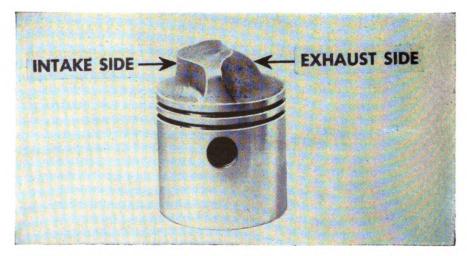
Aluminum alloy piston. (Note two ring grooves, piston-pin hole, and unusual shape of piston's top.)
